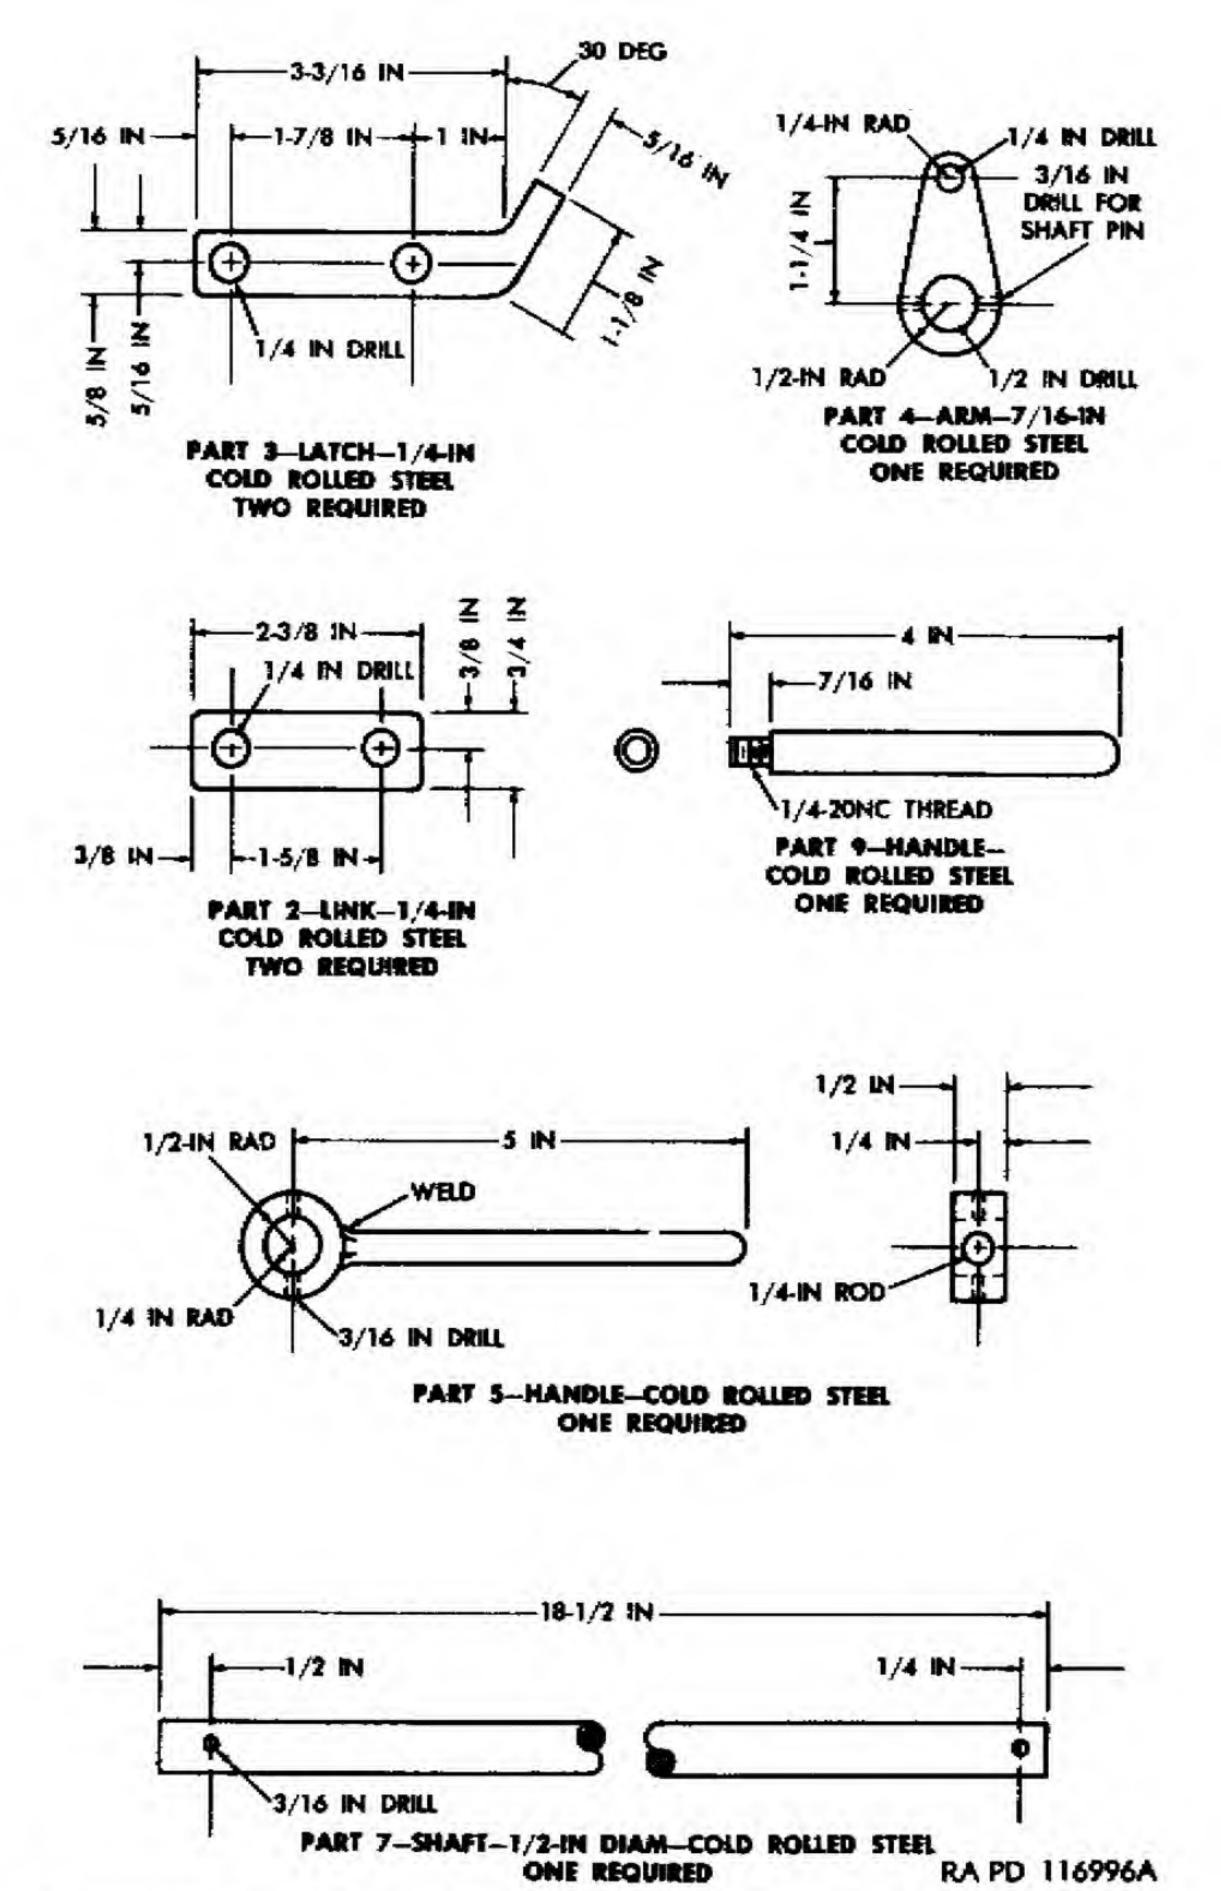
Detail of bench-mounted stamping fixture—part numbers 2, 3, 4, 5, 7, and 9.
